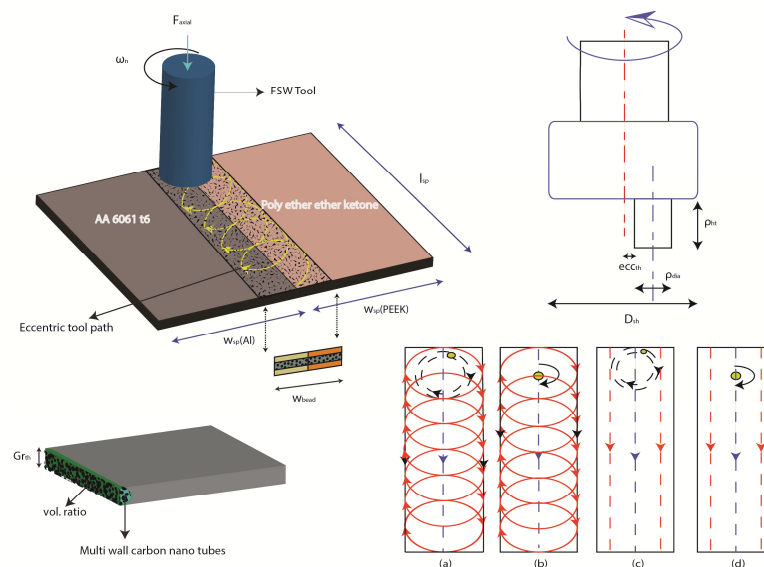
Mechanism of Eccentric Weave Friction Stir Welding
